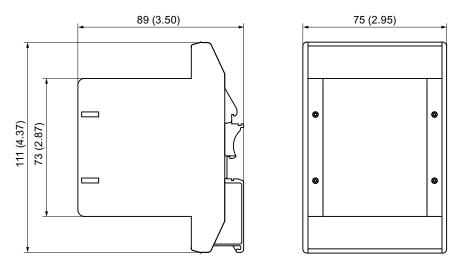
Dimension drawing of Safe Brake Adapter, all data in mm and (inches)
